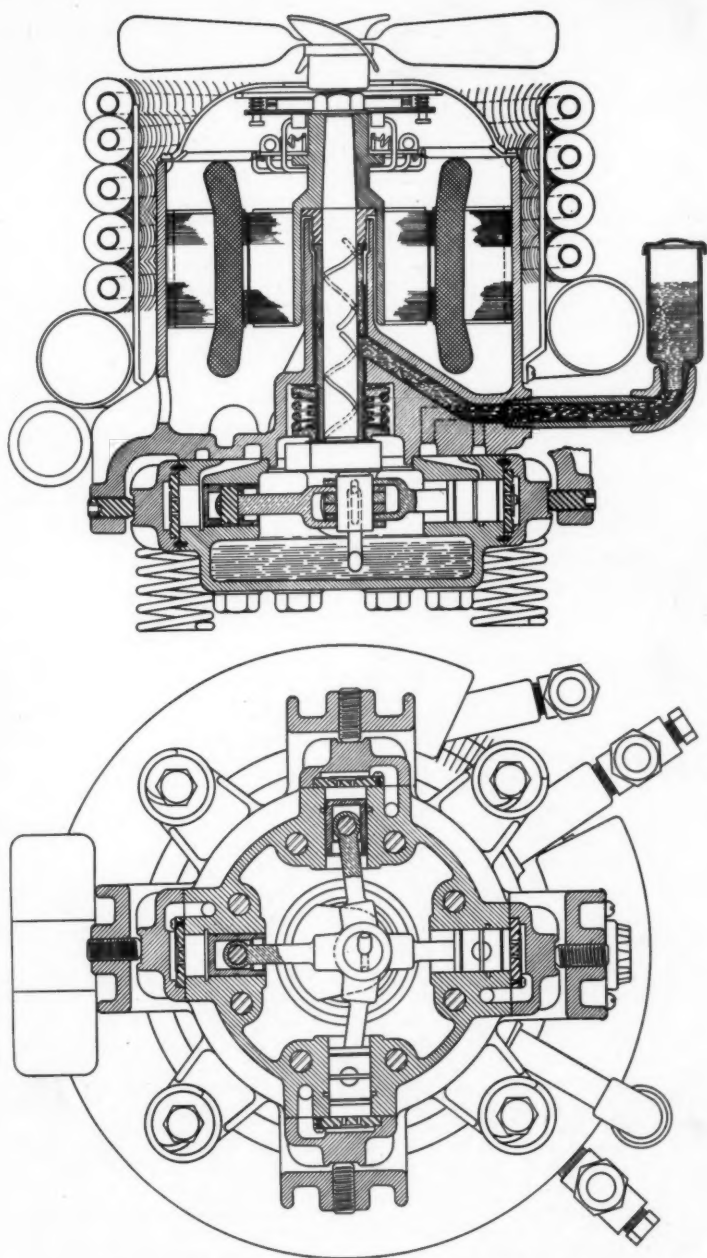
CROSS SECTIONAL VIEW OF THE DICELER UNIT.
